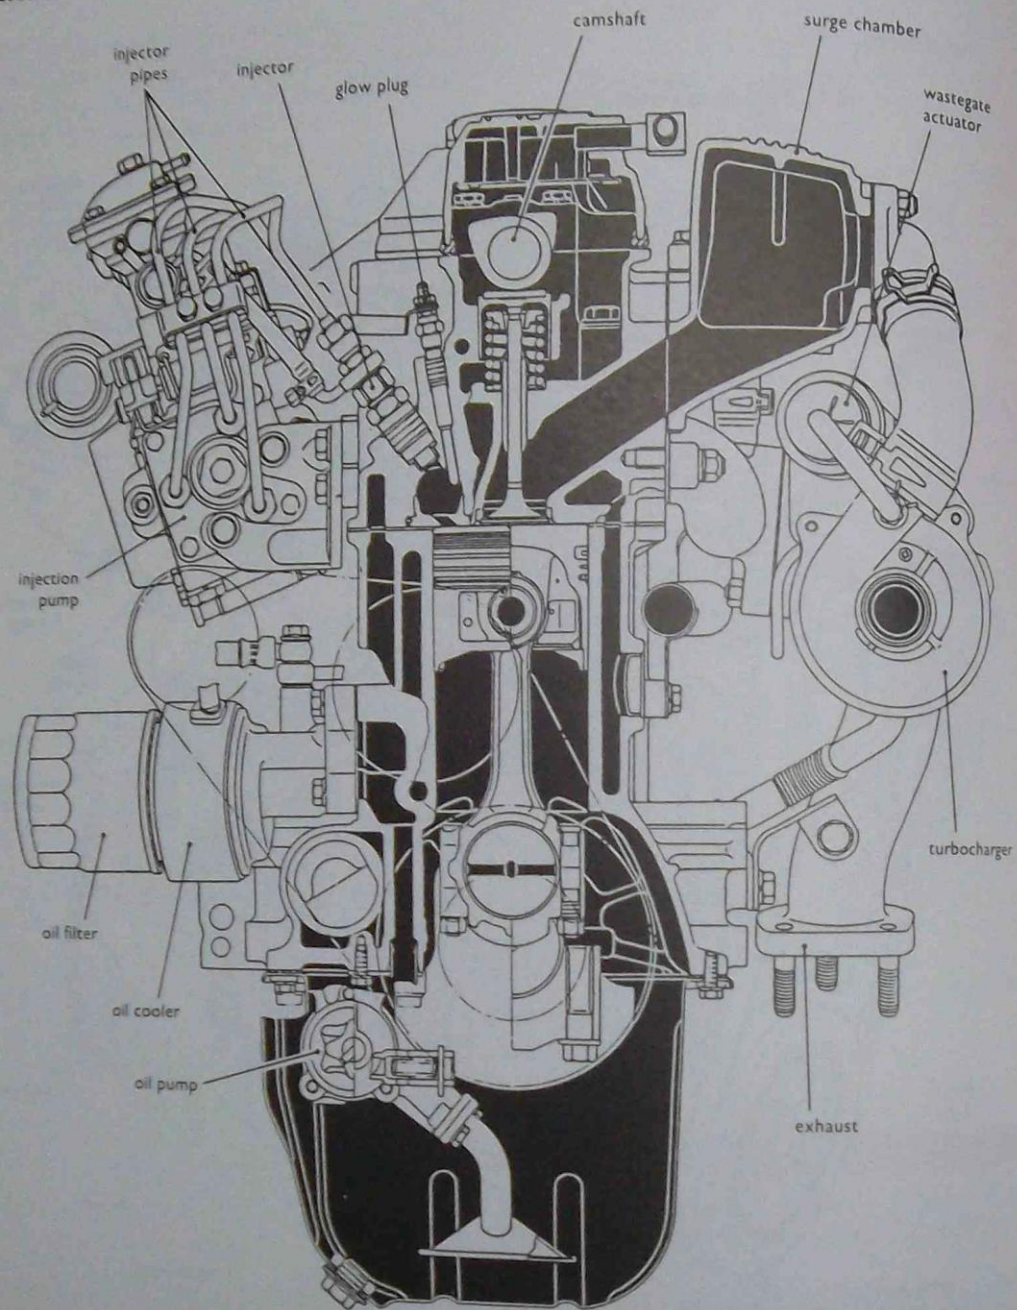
Sectional view of a three-cylinder diesel engine
